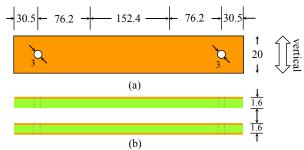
Dimensions of proposed CCC test boards with 35 μm thick copper trace (a) top view (b) side view of single-sided and double-sided board. (Unit: mm)
